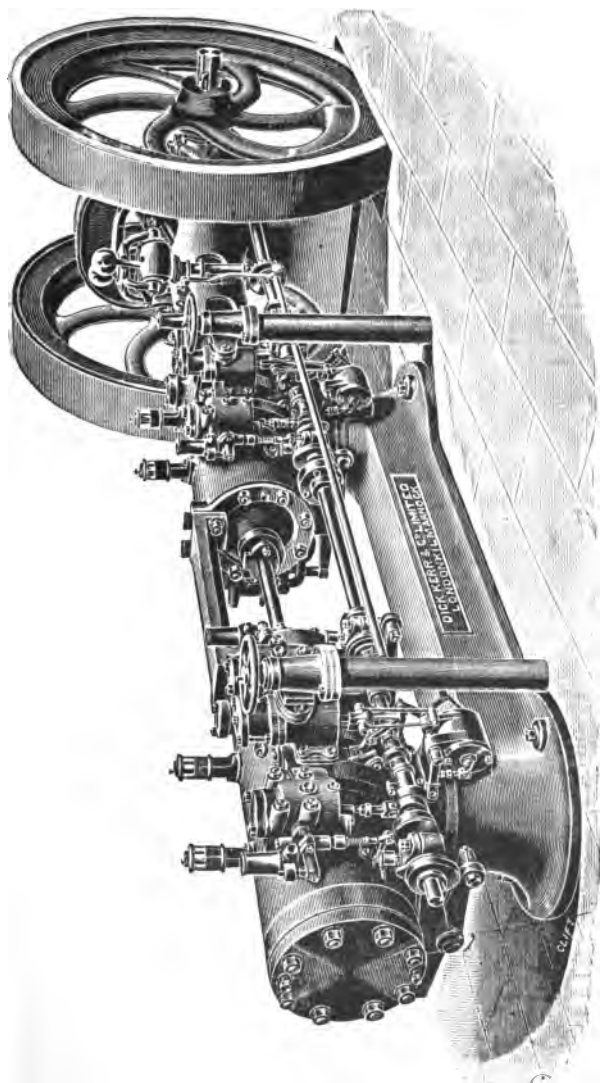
KILMARNOCK TANDEM GAS ENGINE.
